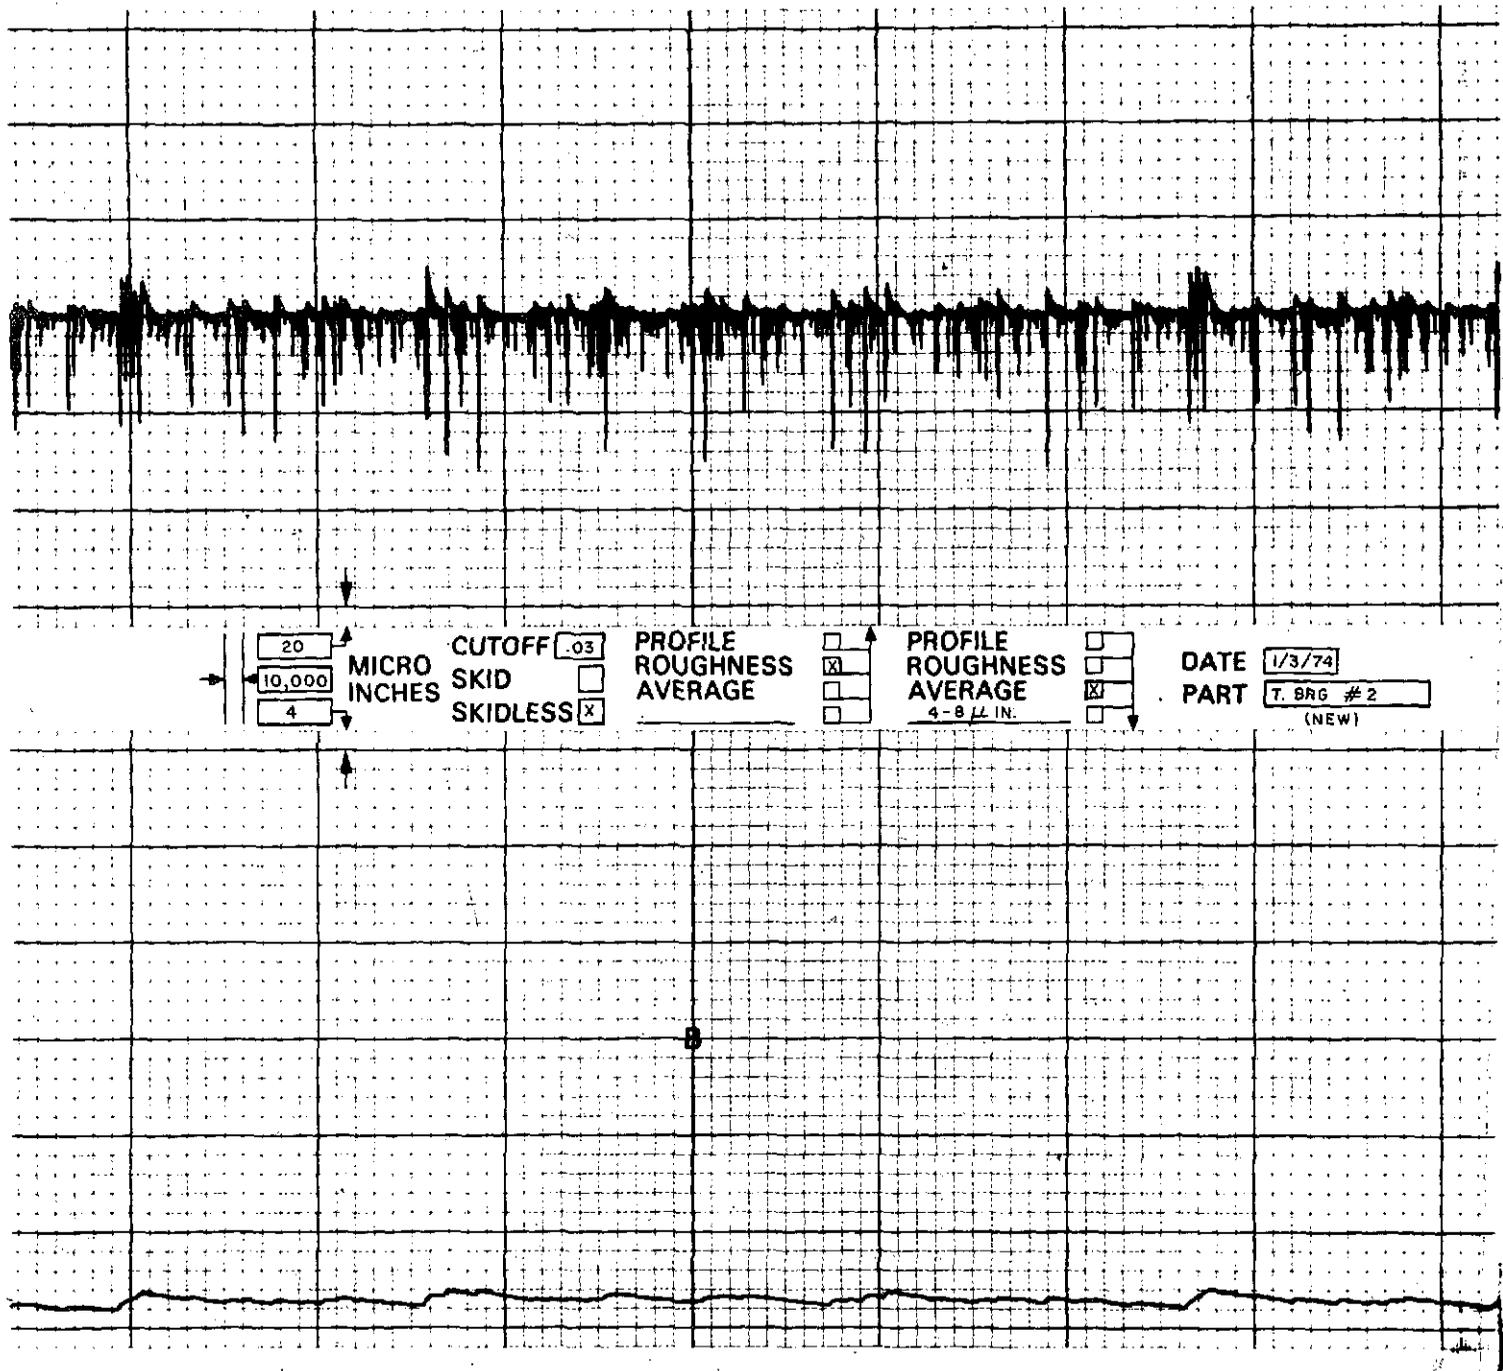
Surface Finish, Thrust Bearing No. 2 (New)
